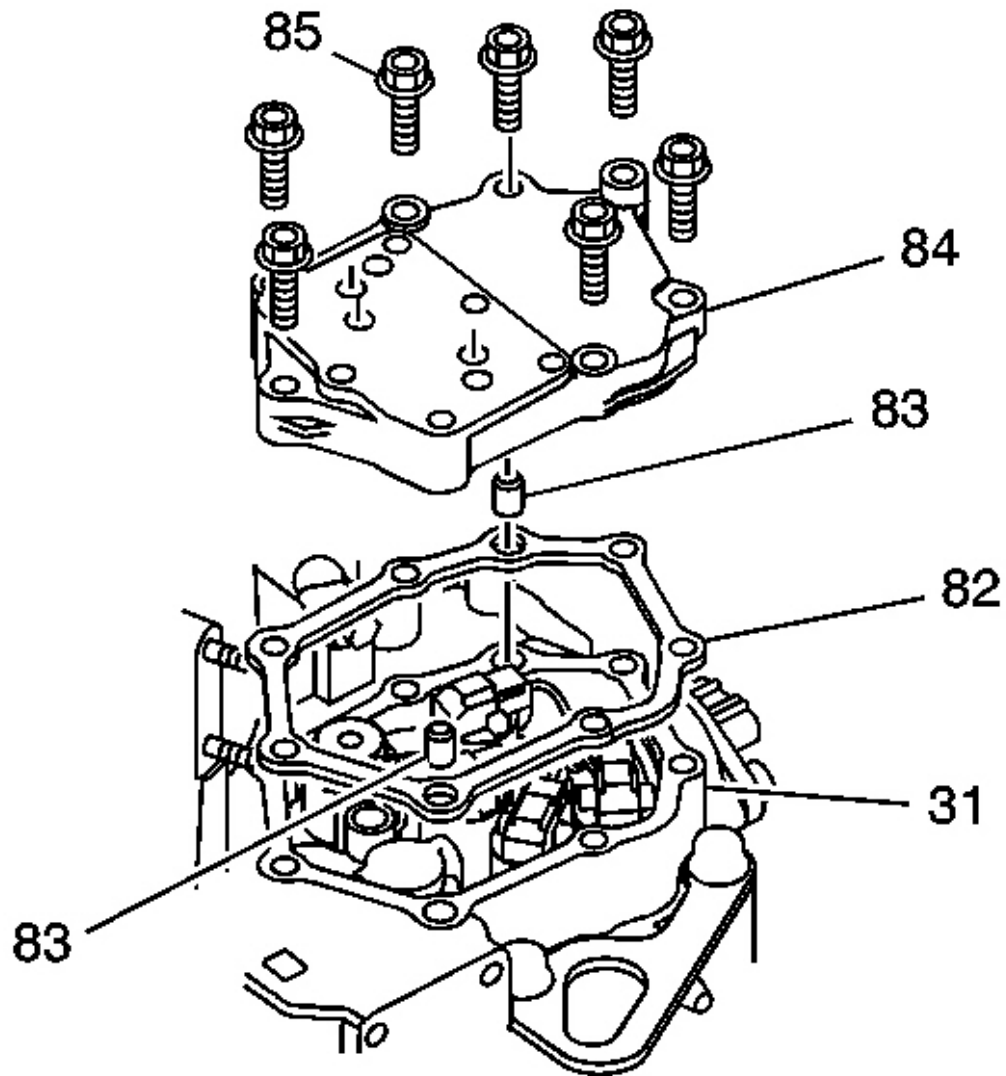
CPC Solenoid Manifold Locating Pins & Gasket
